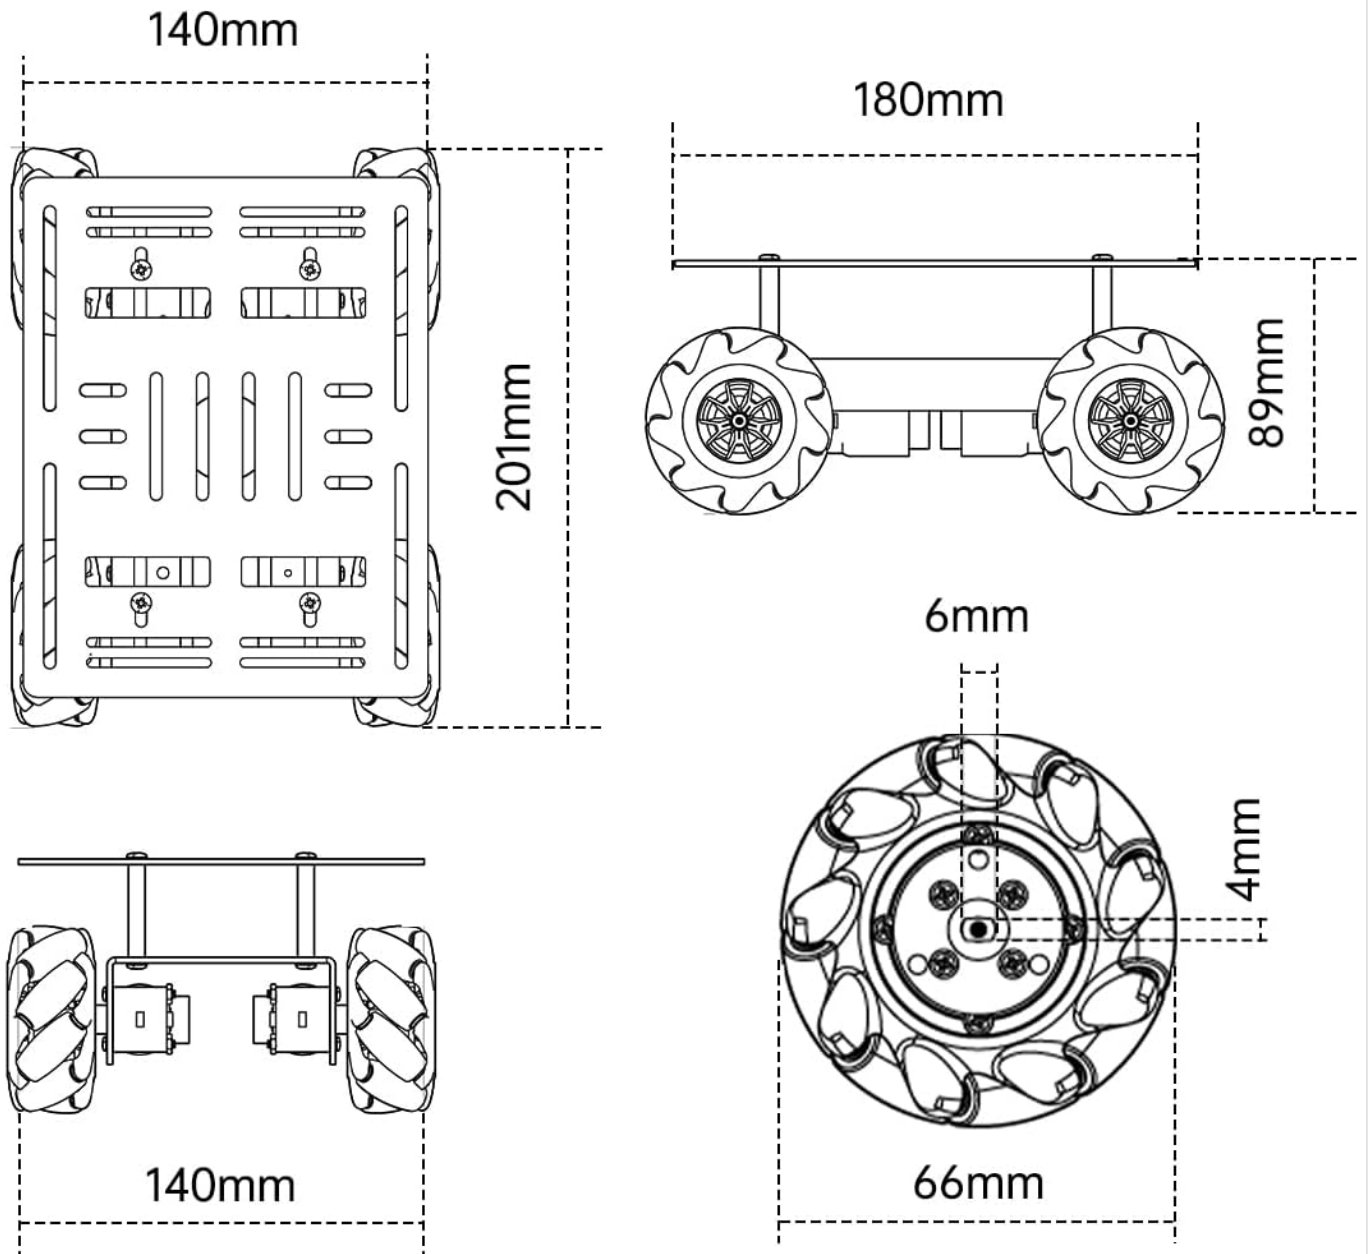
Dimensional drawing of the robot chassis and Mecanum wheel.
